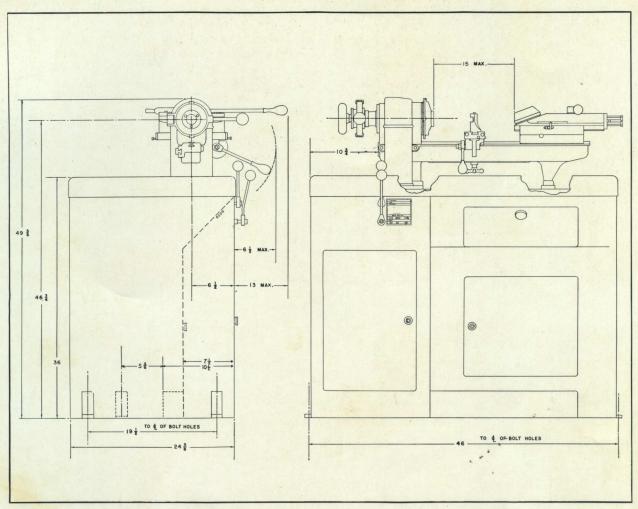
Principal Dimensions of the Wade Hand Screw Machine
